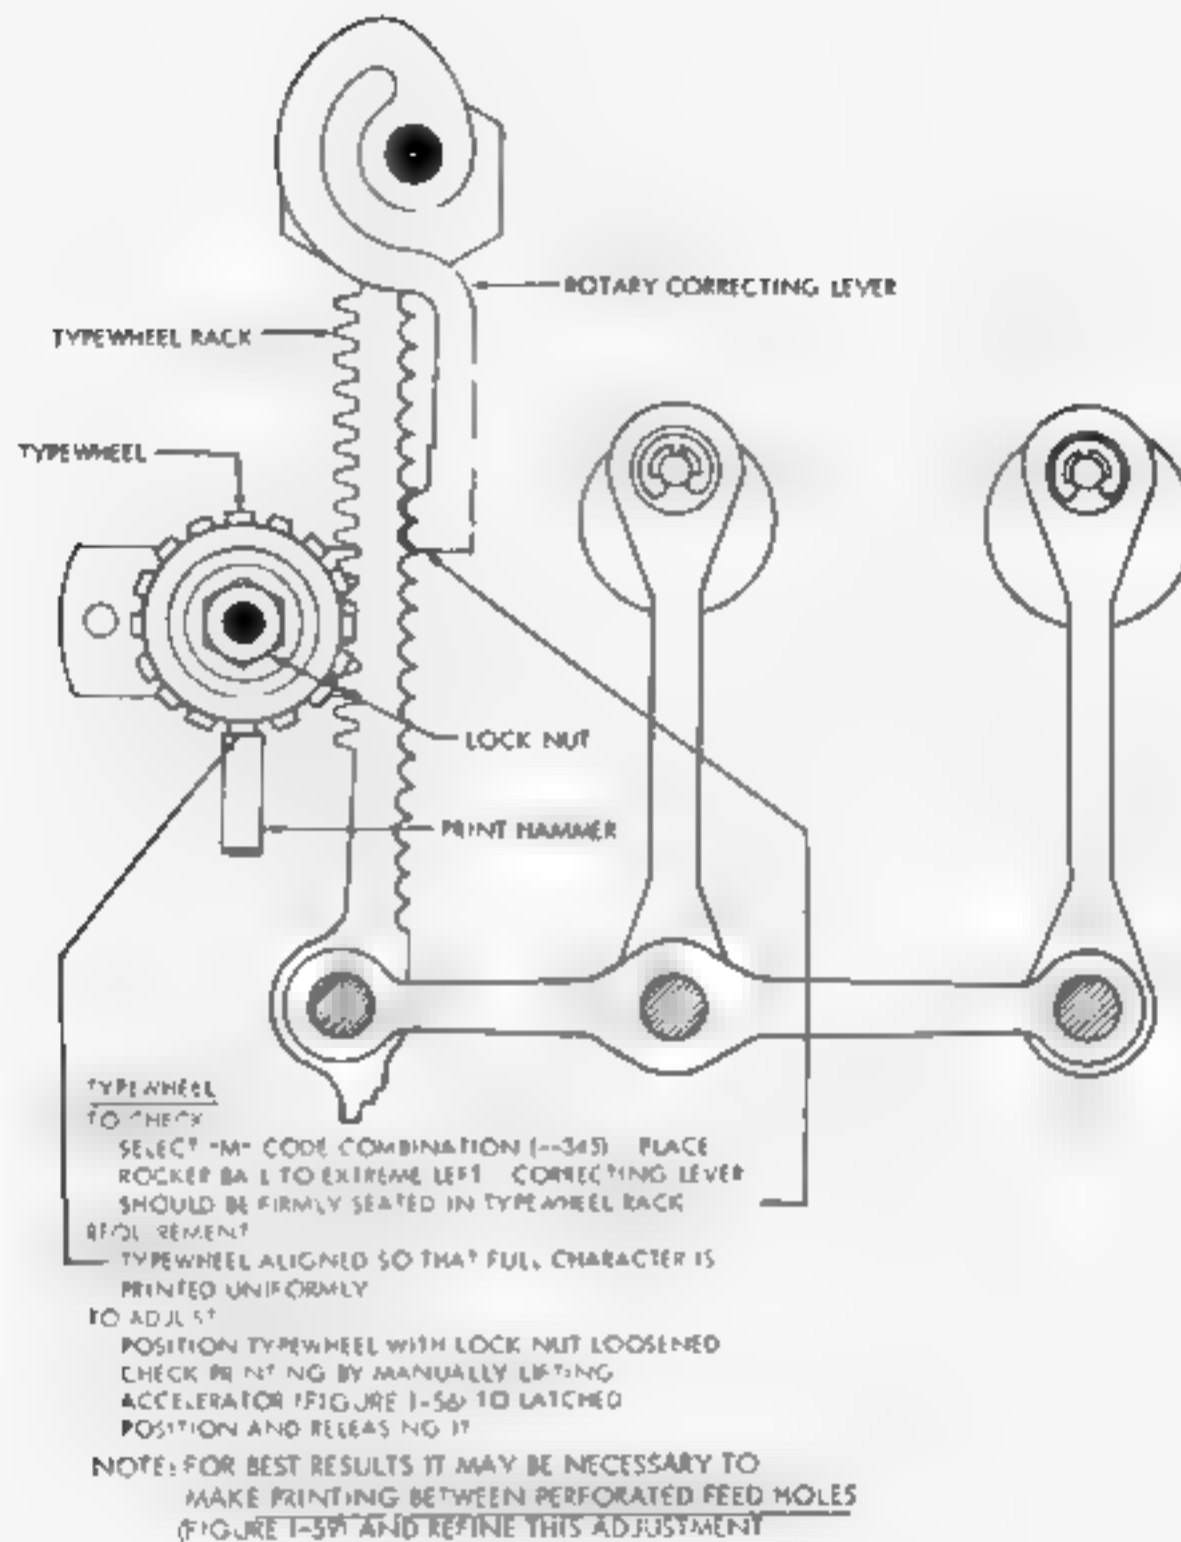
PRINTING MECHANISM FOR FULLY PERFORATED TAPE
